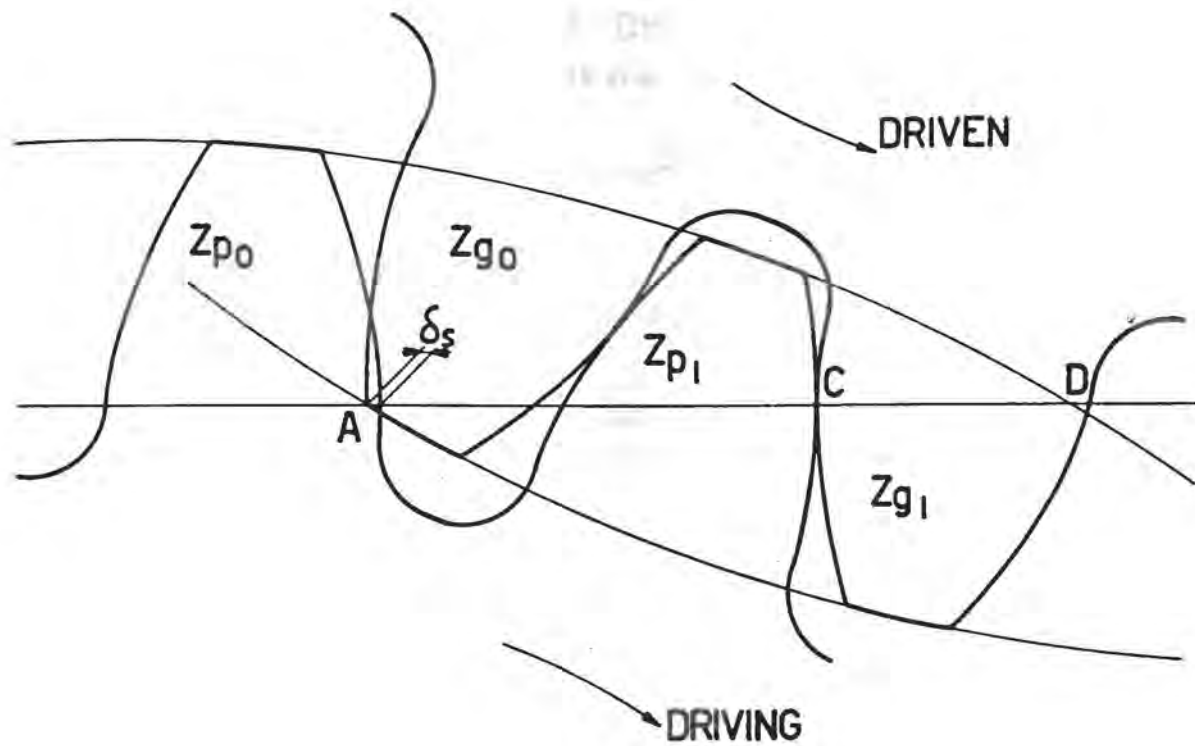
TOOTH INTERFERENCE ON LOADED TRUE-INVOLUTE GEARS
